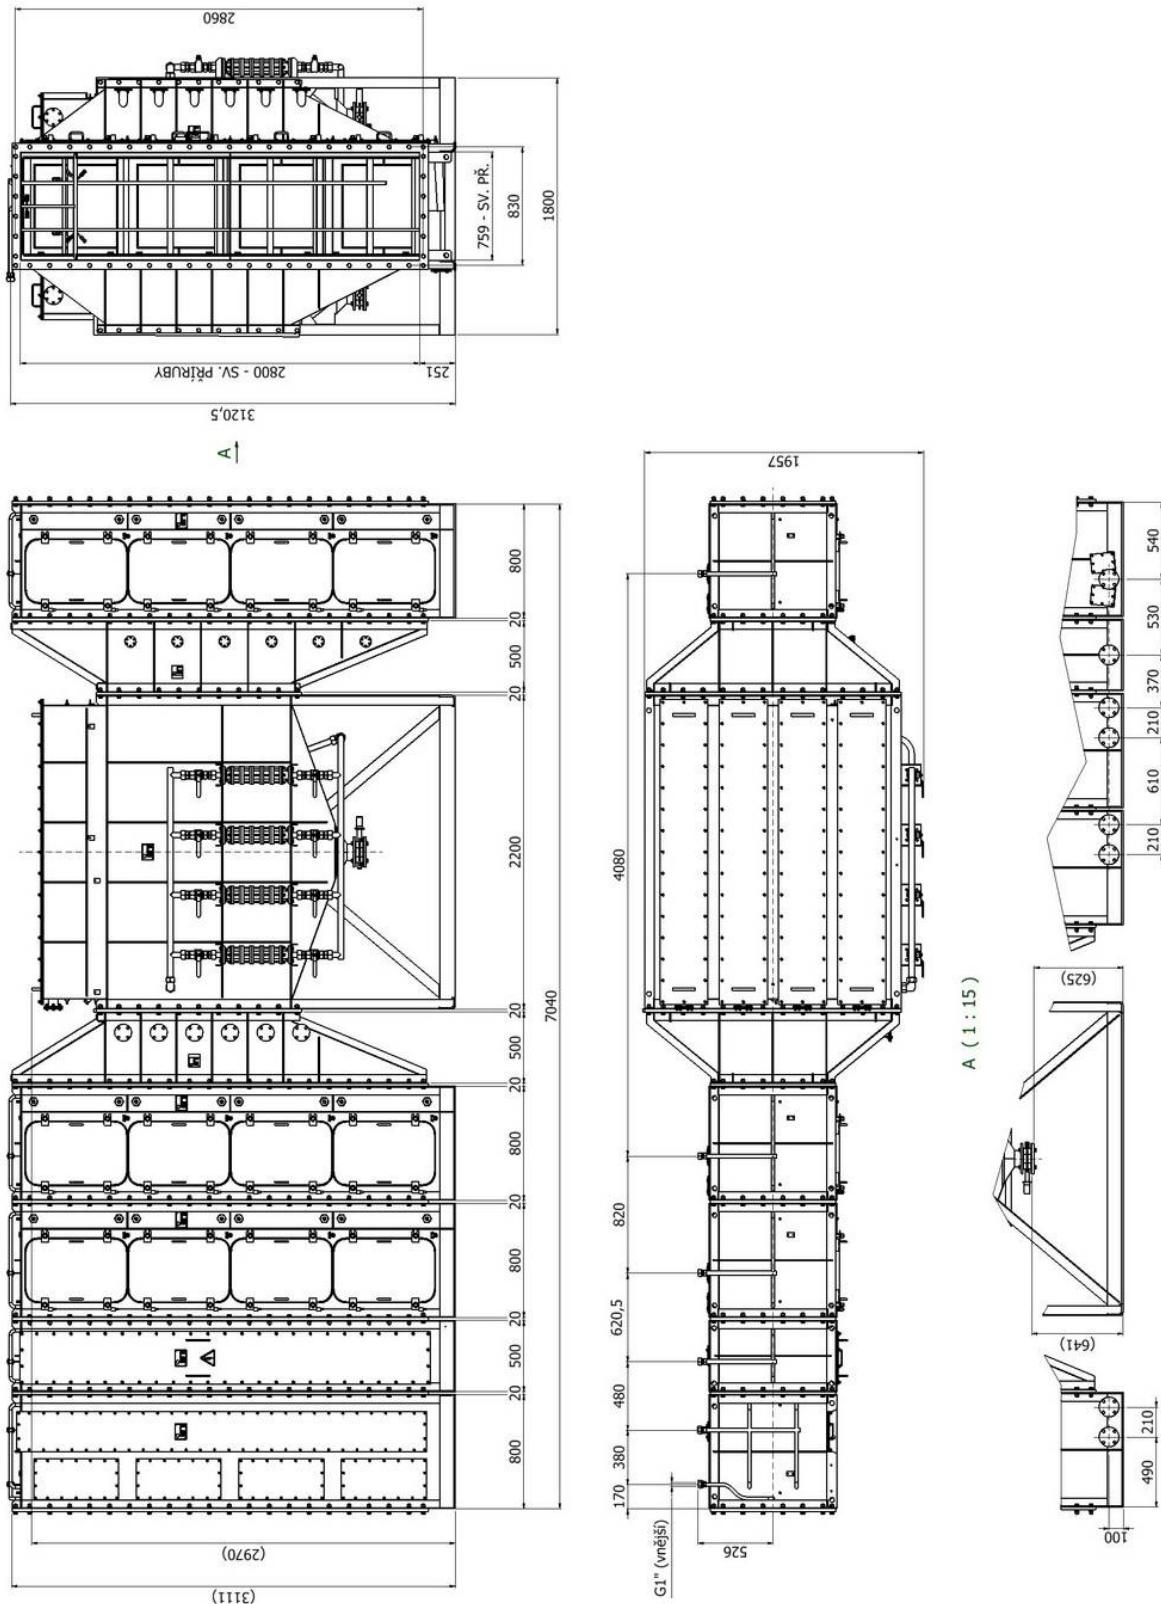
Main dimensions of the filter unit 16, solid right-hand model
